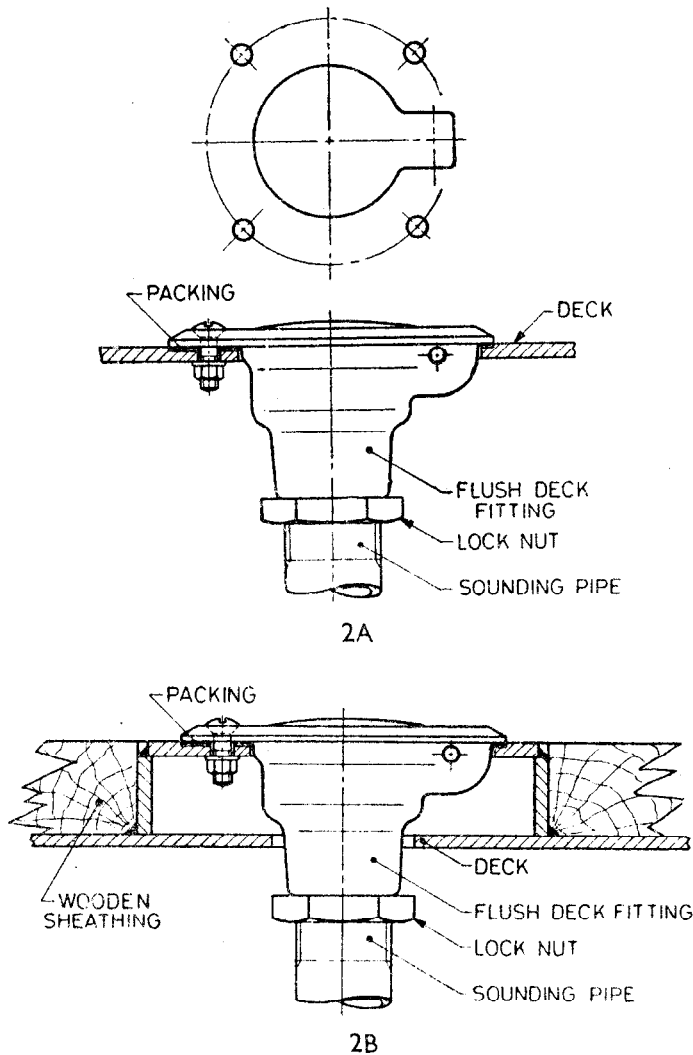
METHOD OF FITTING OF FLUSH DECK FITTINGS WITH PILFER-PROOF CAP TO HEAD OF SOUNDING PIPE
